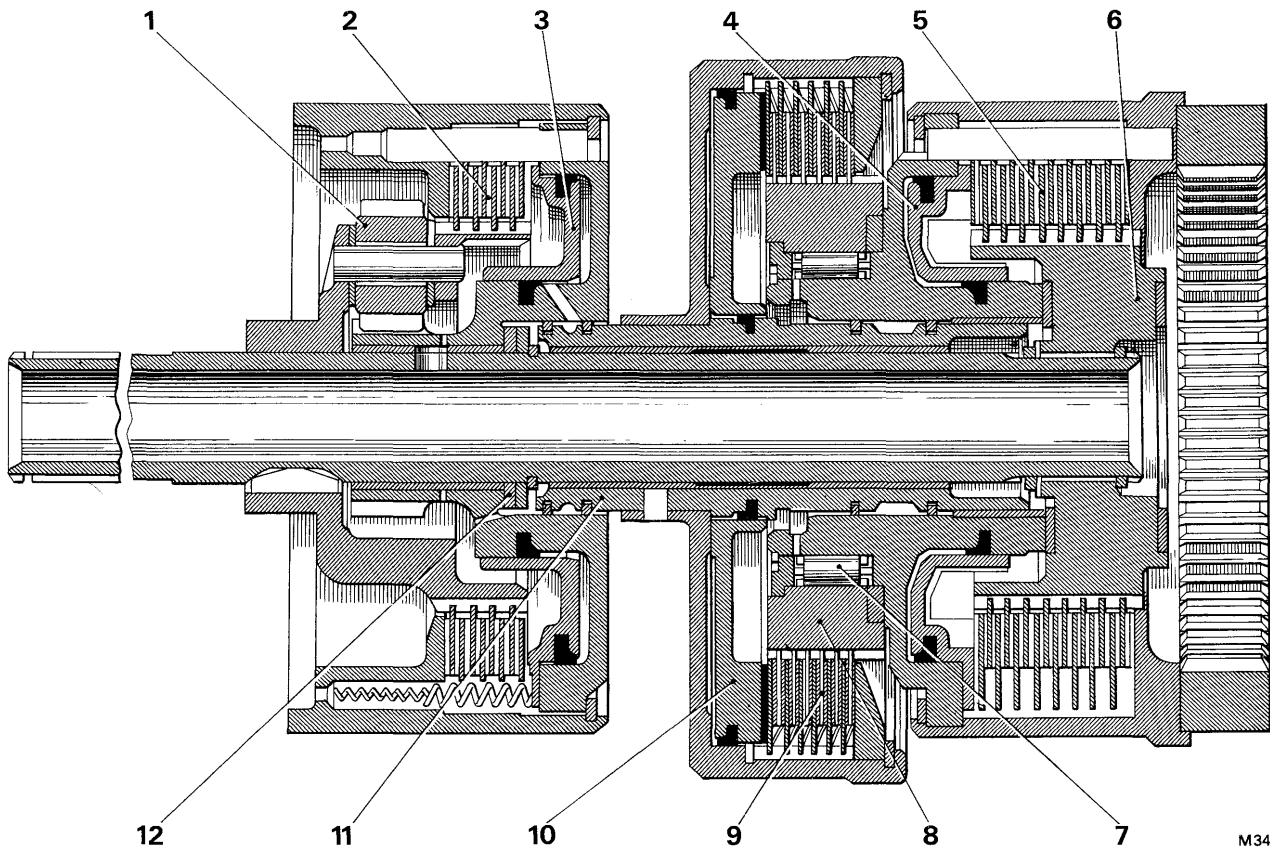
DRUM ASSEMBLIES—SECTIONED VIEW
